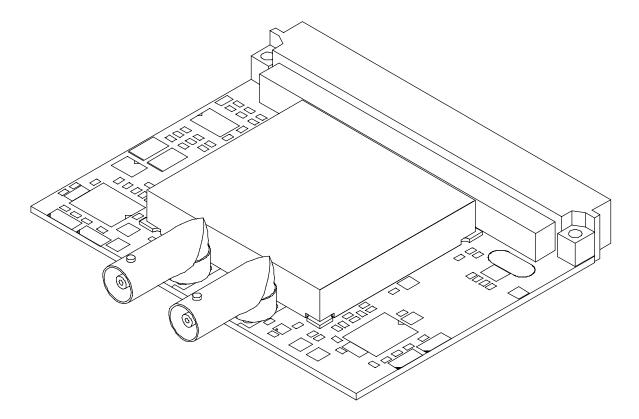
Fig C-e Mortara Receiver Module (MRM-2500) Printed Circuit Board Assembly Complete Ref: 26125-002-50
